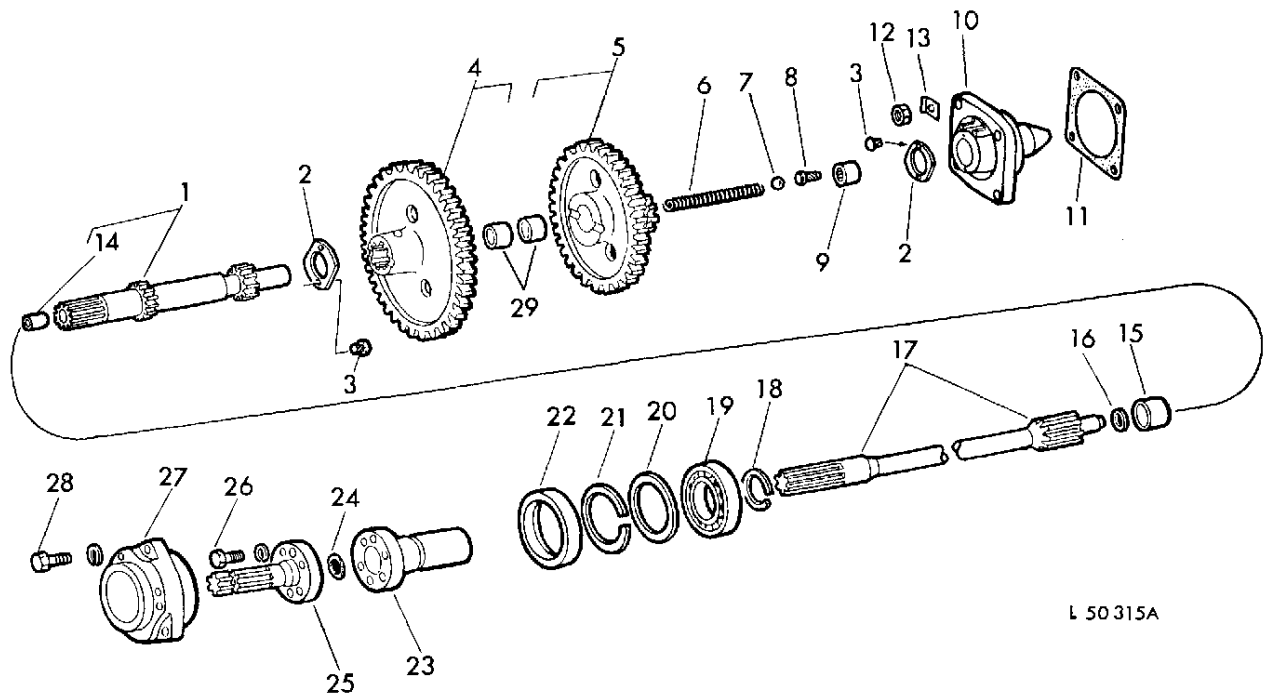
Exploded View of Dual Rear 540 and 1000 rpm PTO Shaft
